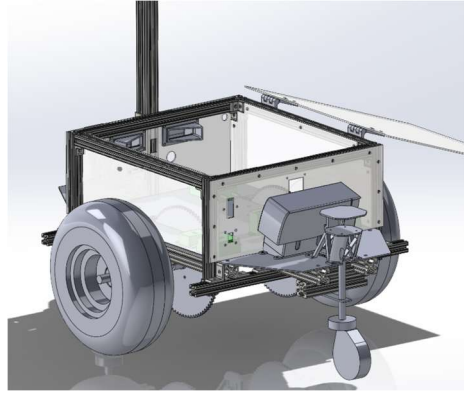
Full CAD assembly of ATNA showing the overall vehicle layout, sensor mast, drivetrain, electronics cage, and trimmed chassis corners.
